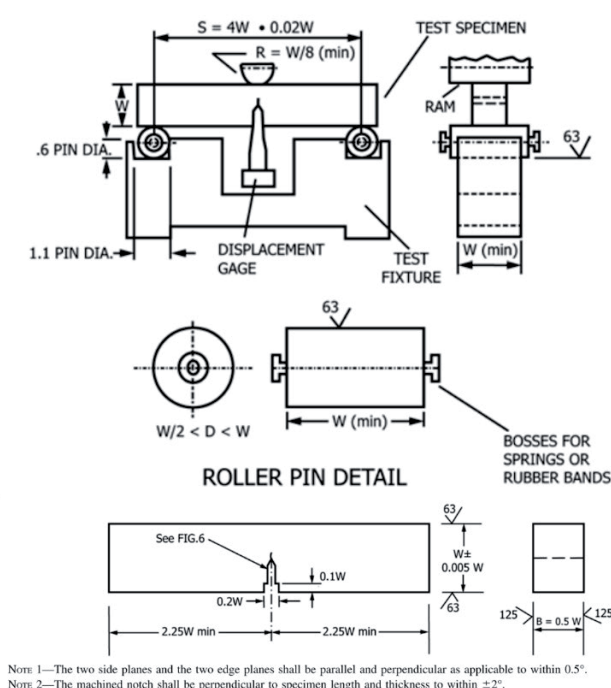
The upper diagram describes the ASTM standard for a fixture, which can be used in a fracture toughness test, and below the respective dimensions of the sample. Taken from reference [81].
